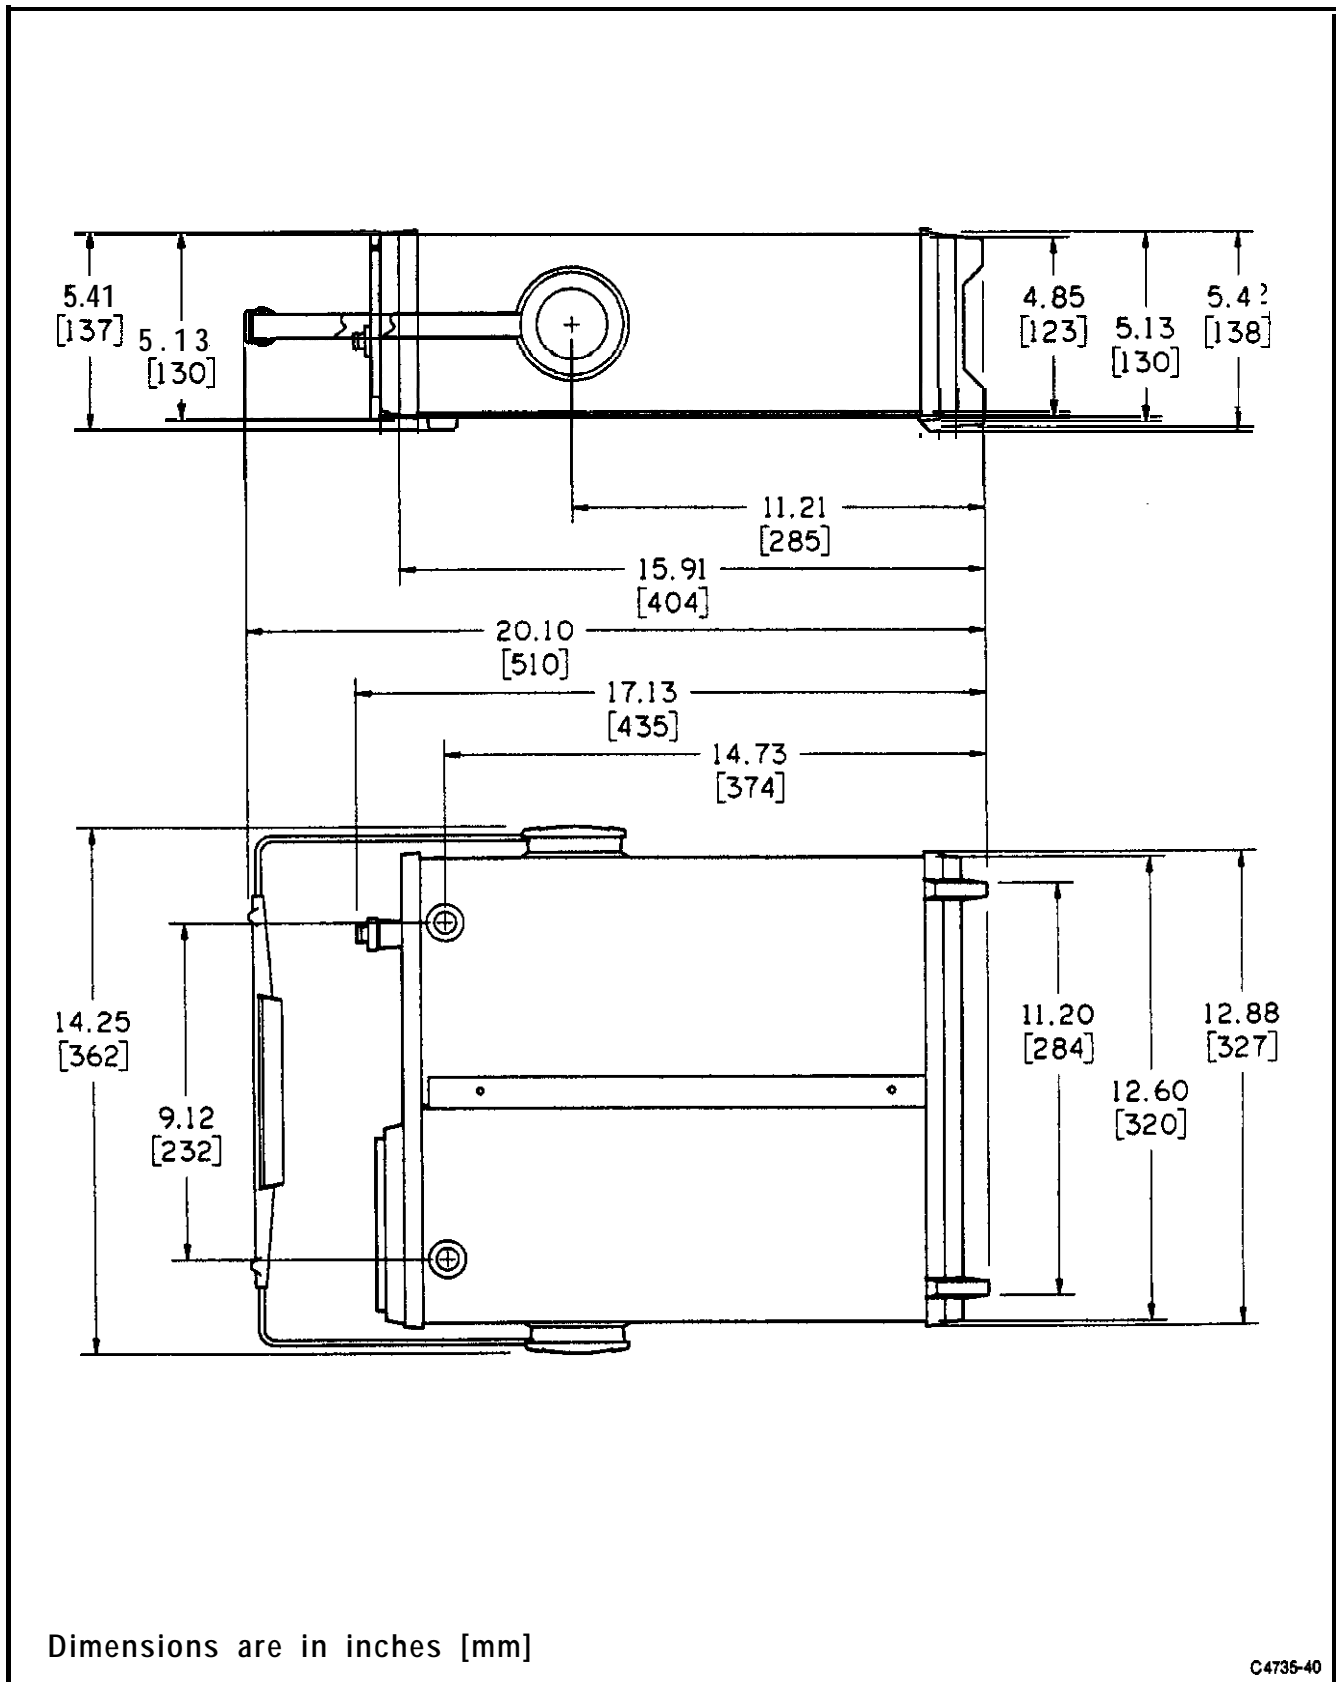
Physical dimensions of the 2235 Oscilloscope.
